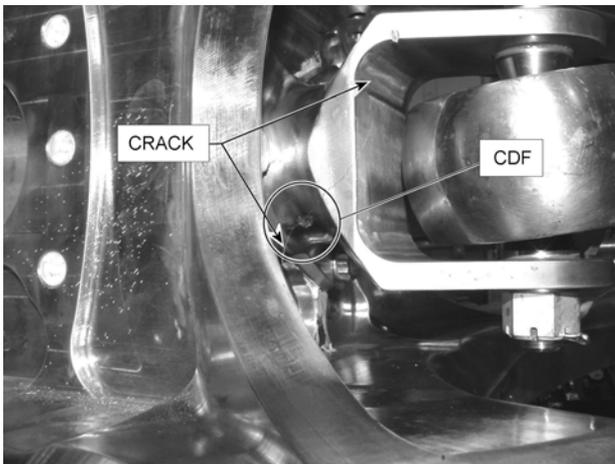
Damper Bracket Fatigue Crack Origin at a Clearly Detectable Flaw.
